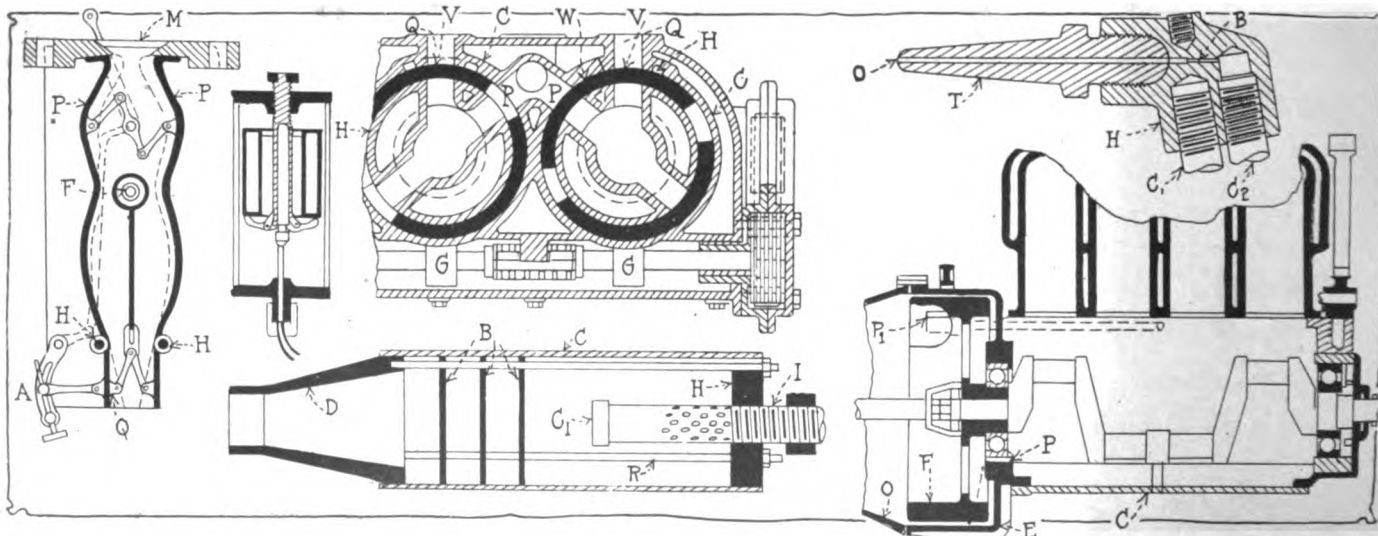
Roth carbureter. Fig. 2—Belden rotary valve. Fig. 3—Sames muffler. Fig. 4—Buckham welding torch. Fig. 5—Coffin oiling system
